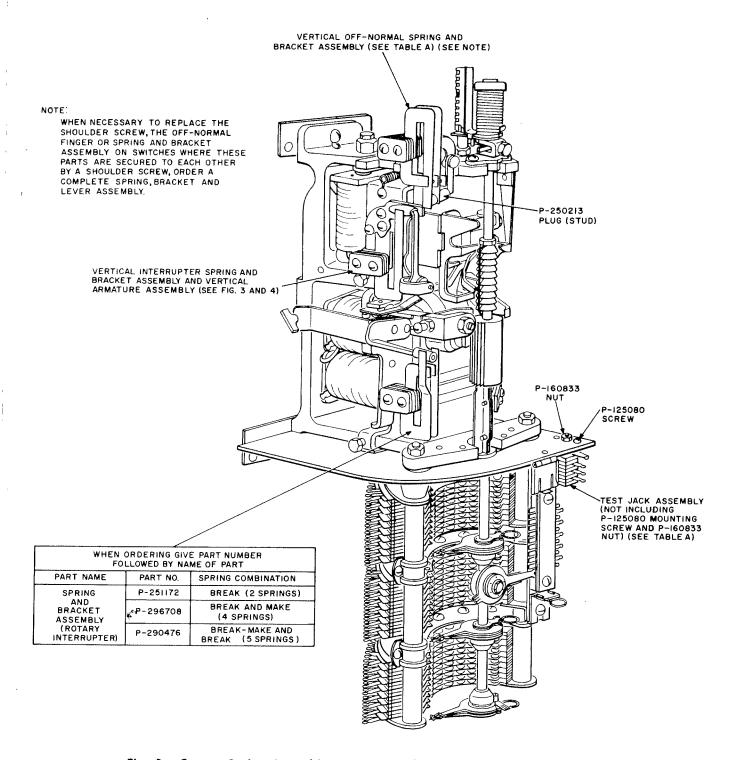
Contact Spring Assemblies, Test Jack ≰ssemblies, and Associated Parts of 197-Type Switch as Viewed From the Left Side
